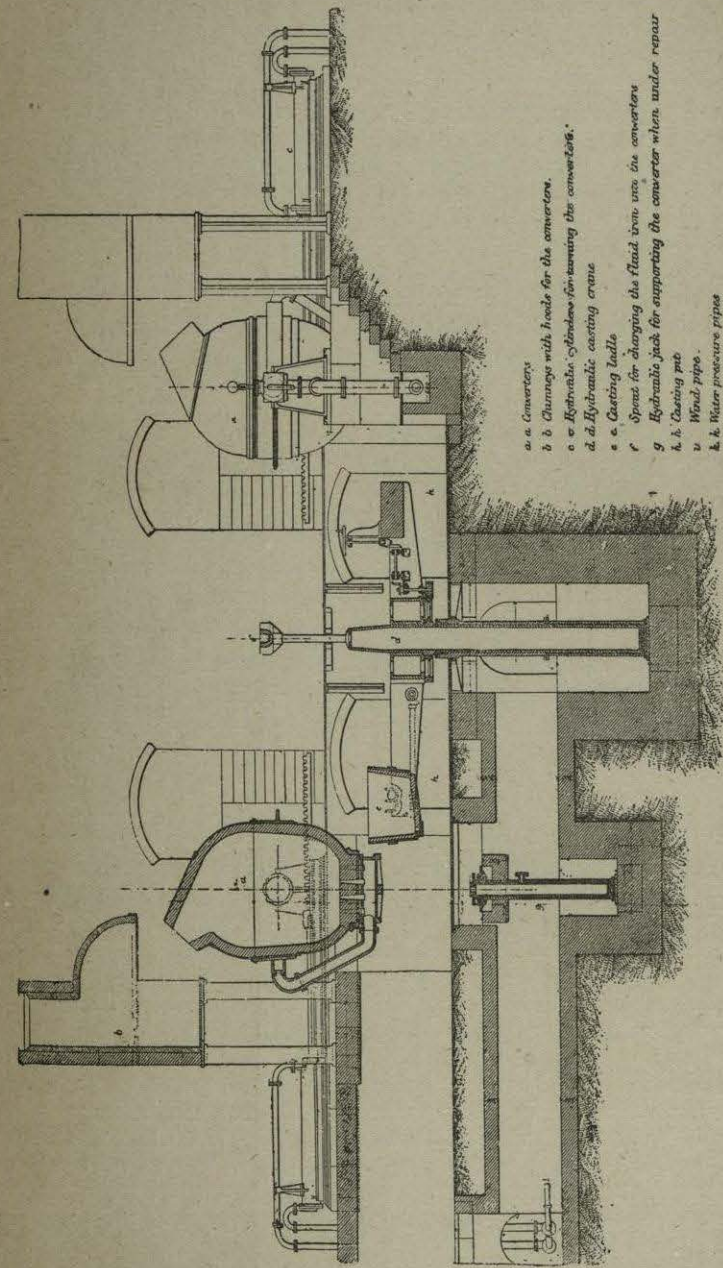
Bessemer Plant showing arrangement of Converters, Casting Ladle, and deep Casting Pit in early English Plants.
